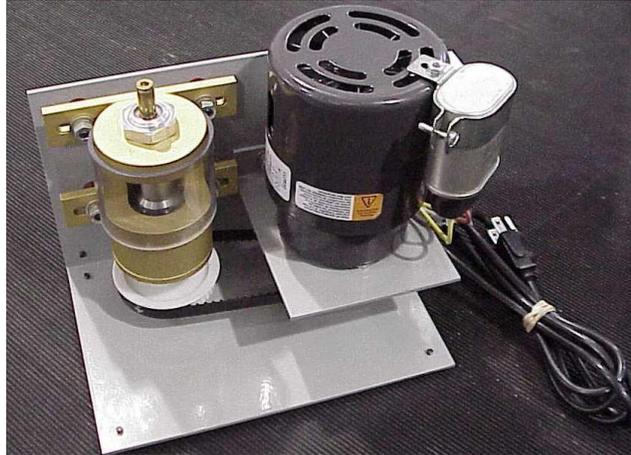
Old style trimmer (without belt guard) rotated onto its base, ready to trim cases. Note that this view shows the side of the trimmer that would normally face away from the user during trimming.
